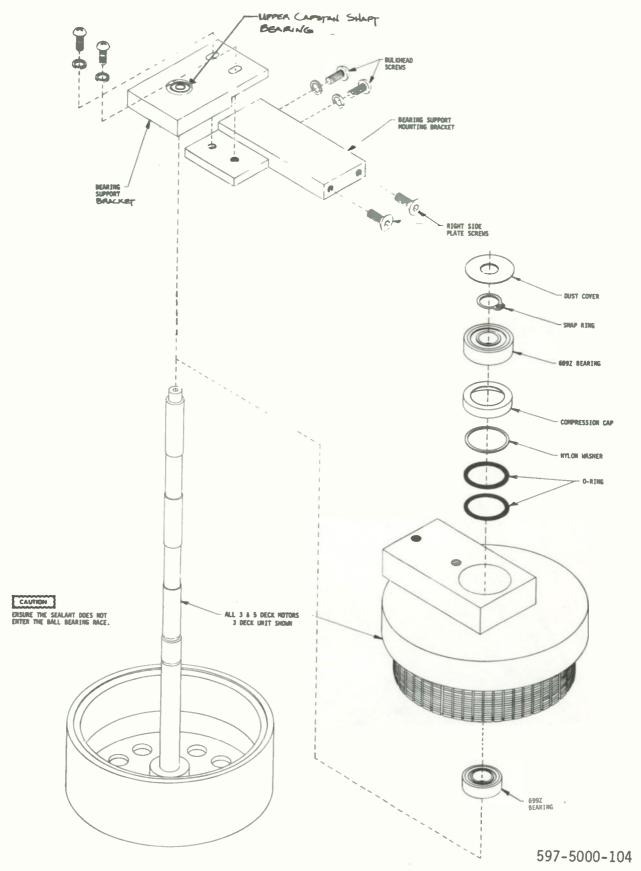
ASSEMBLY DIAGRAM, MOTOR
